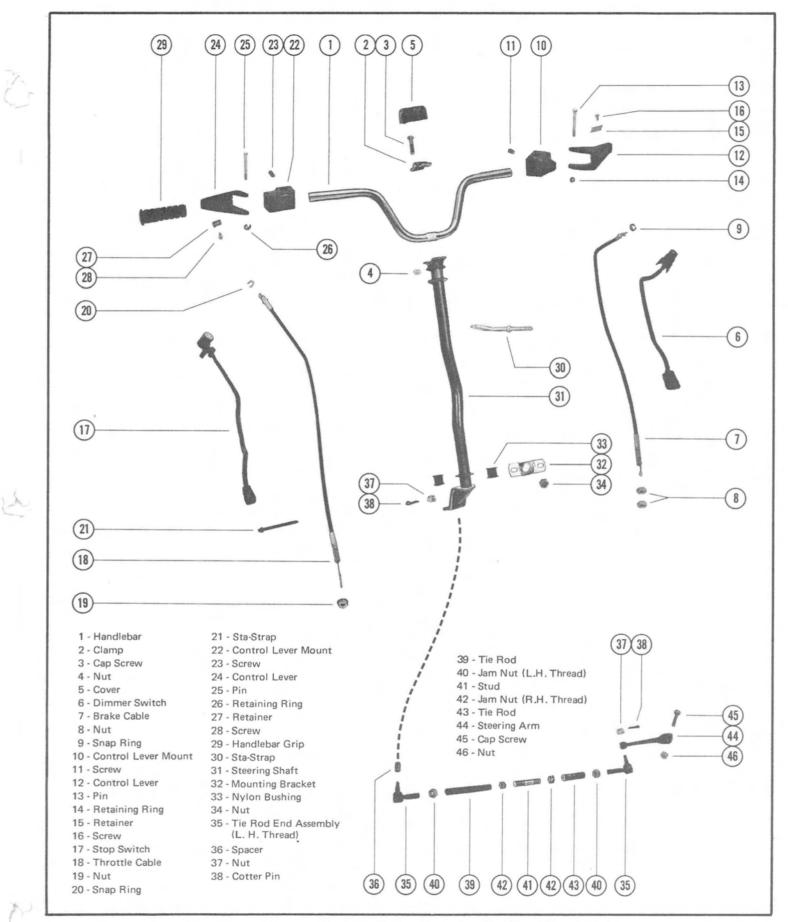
Tie Rod and Steering Shaft Components for Mark I and Mark II Models
